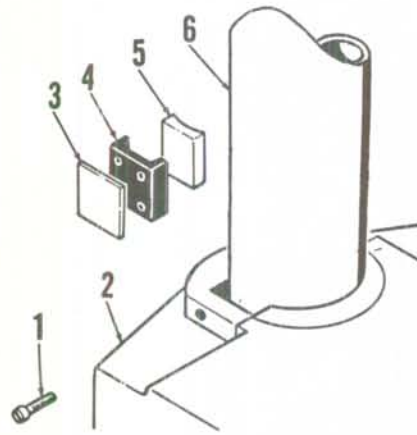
Exploded view of steering friction adjusting mechanism used on OX 140.
